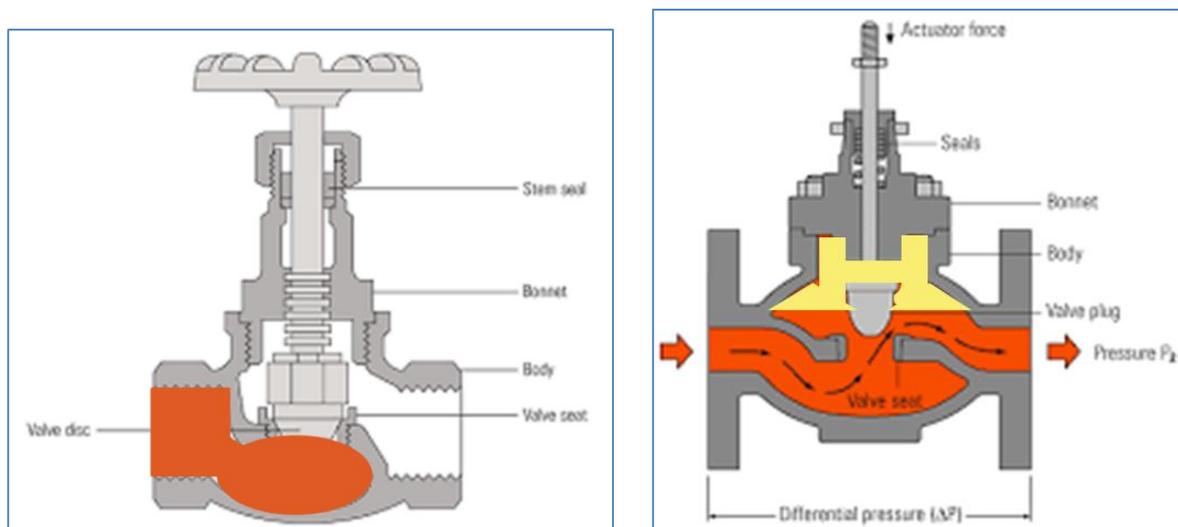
Minimal Danger with Globe Valve used as a transformer drain valve
